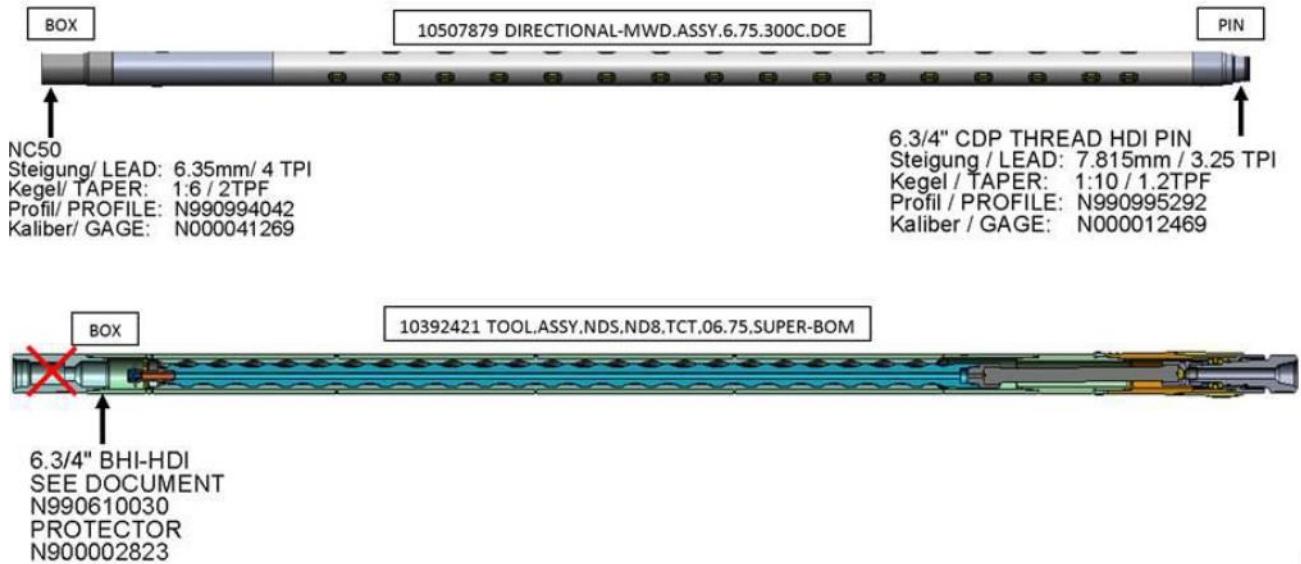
Bottom hole Assembly used in BH-J-20 Well comprising Drill Bit, Drilling Motor and 300°C
